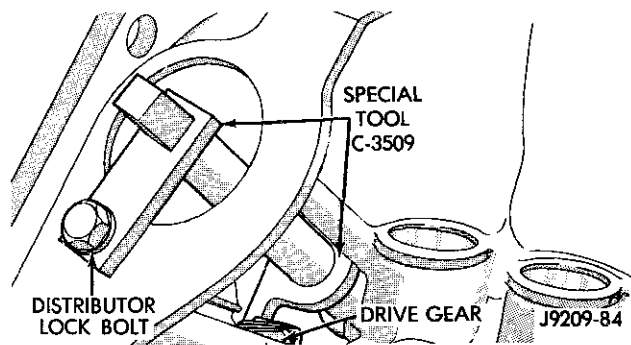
Camshaft Holding Tool C-3509 (Installed Position)
